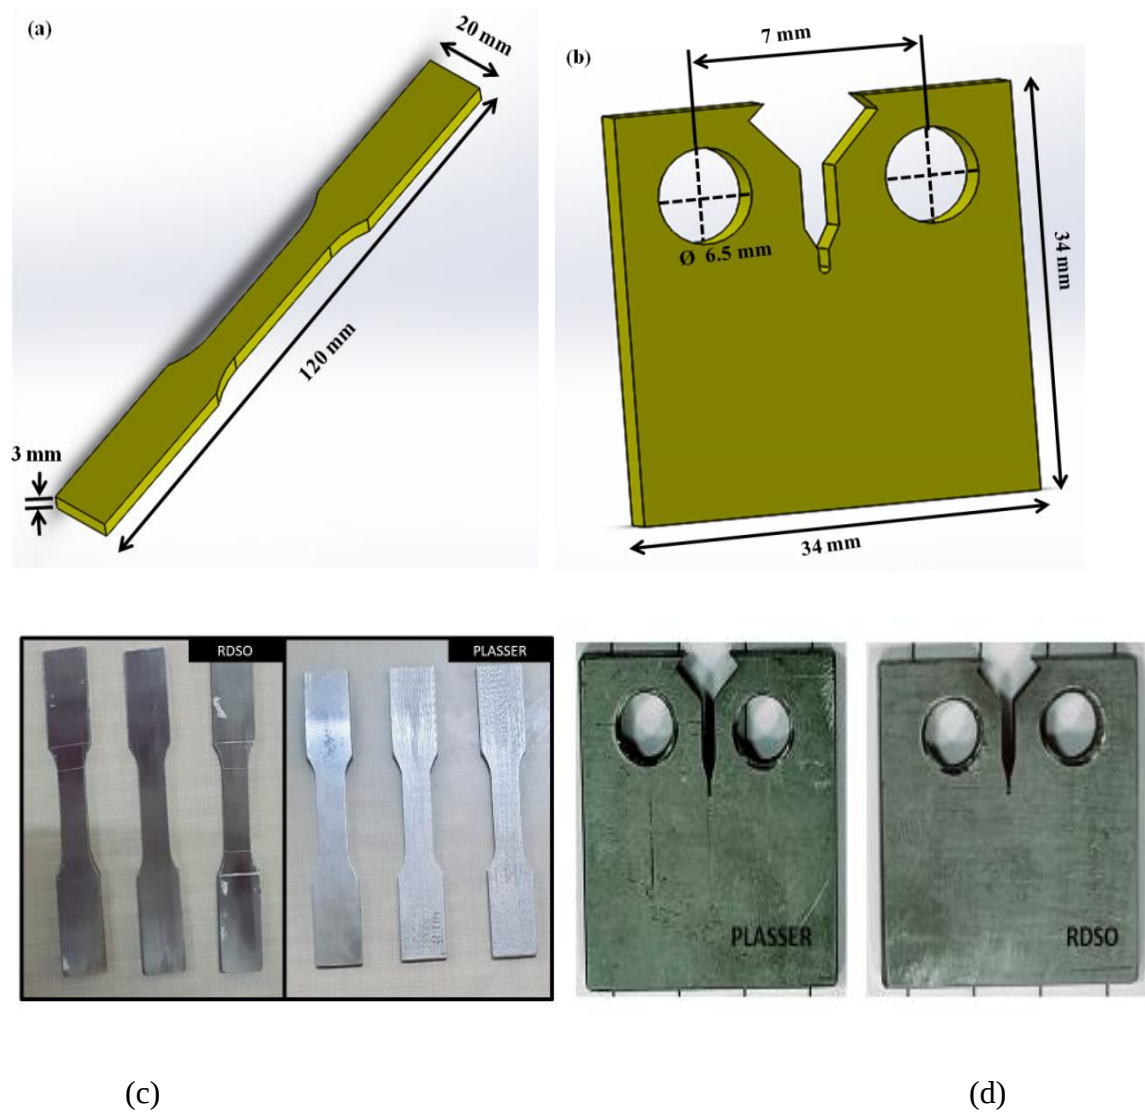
Dimension of various specimen (a) Tensile Specimen 3D Model (b) CT Specimen 3D Model (c) Actual Tensile Specimen Plasser & RDSO (d) Actual CT Sample of Plasser & RDSO
